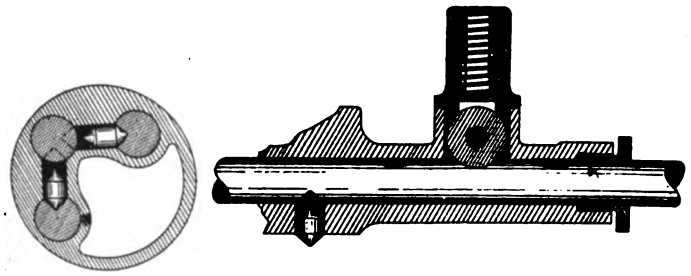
THE LOCKING MECHANISM USED ON THE SHIFT ROD OF THE FOUR-SPEED GEAR TRANSMISSION
